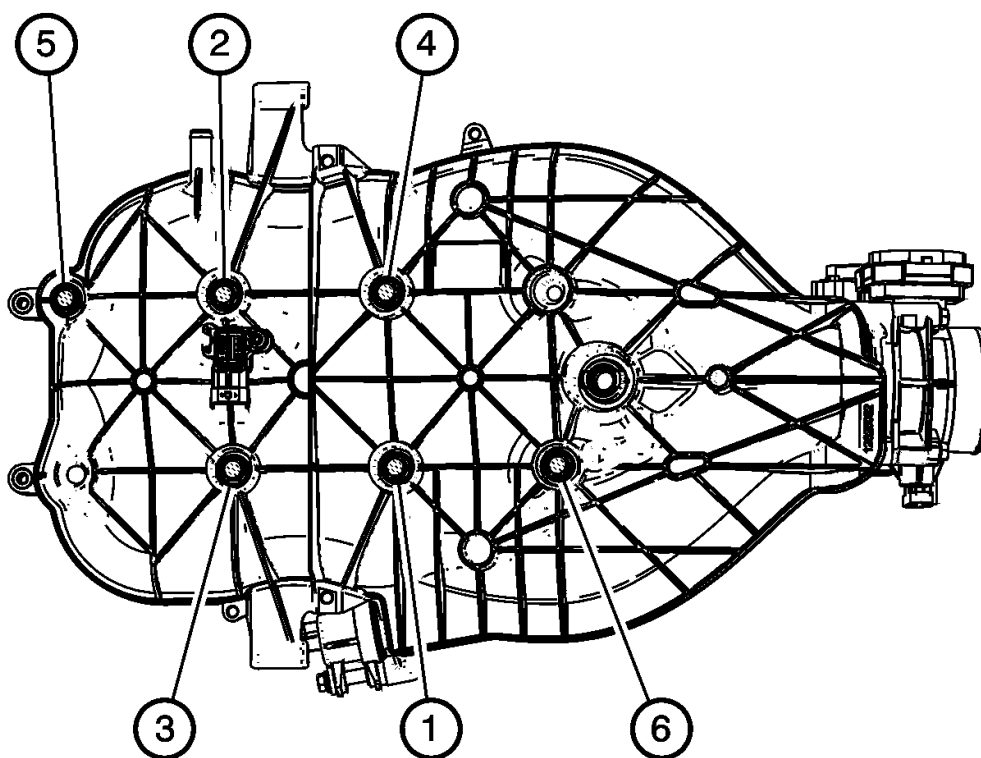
Identifying Intake Manifold Bolts Tighten Sequence
